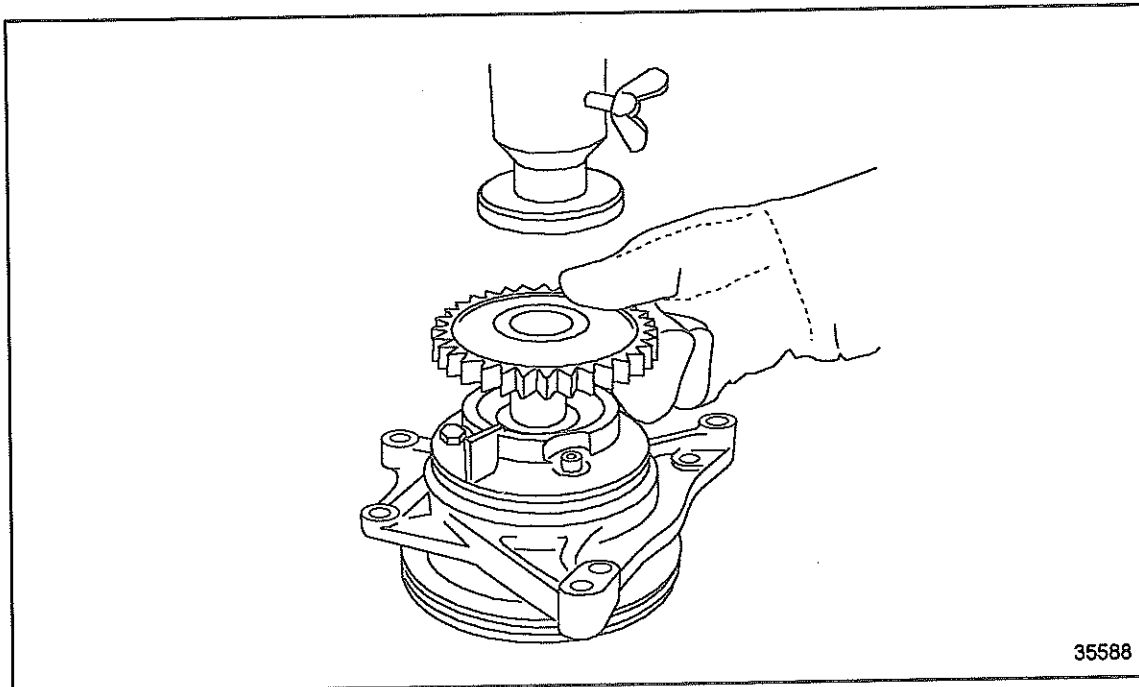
Locating Bearing Housing with Hex Bolt against Seal Carrier
